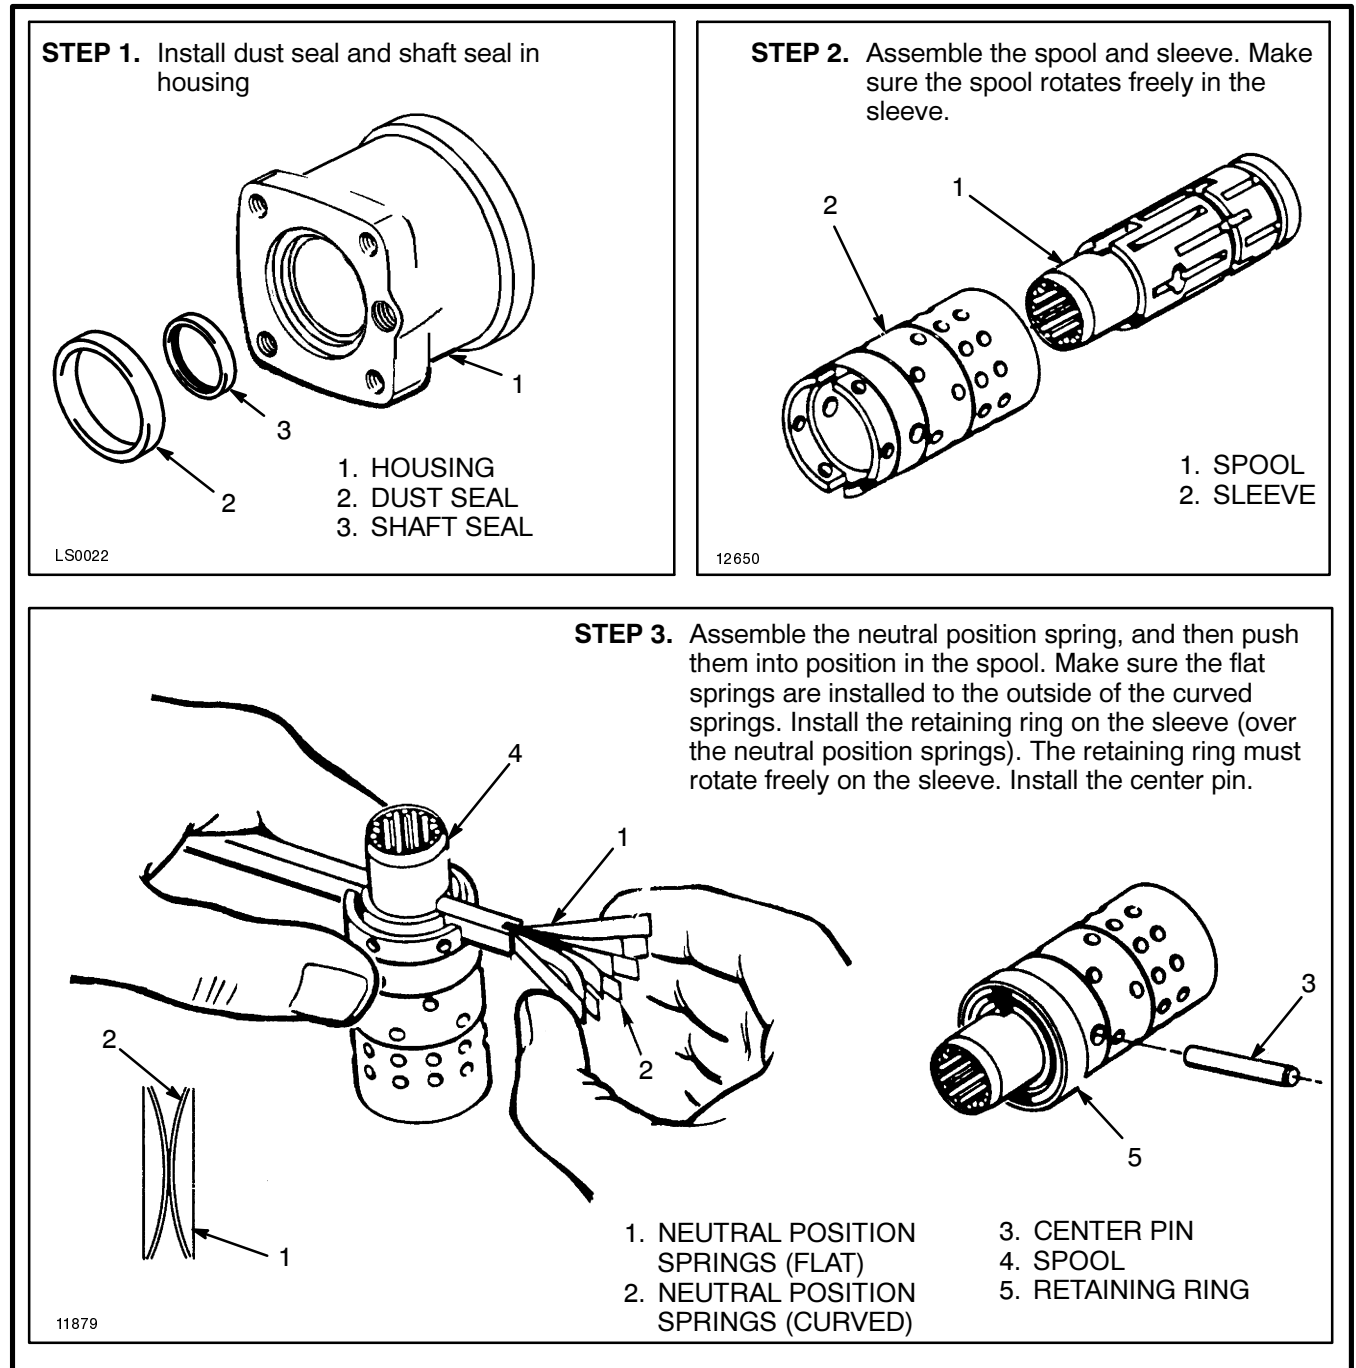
ASSEMBLY OF THE STEERING CONTROL UNIT (1 of 3)
